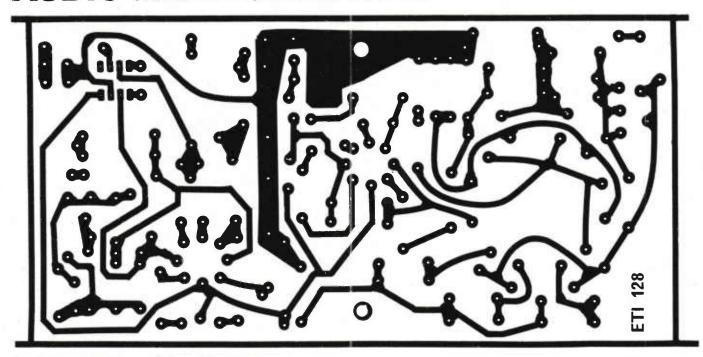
Printed circuit layout. Full size 170 x 87 mm.
